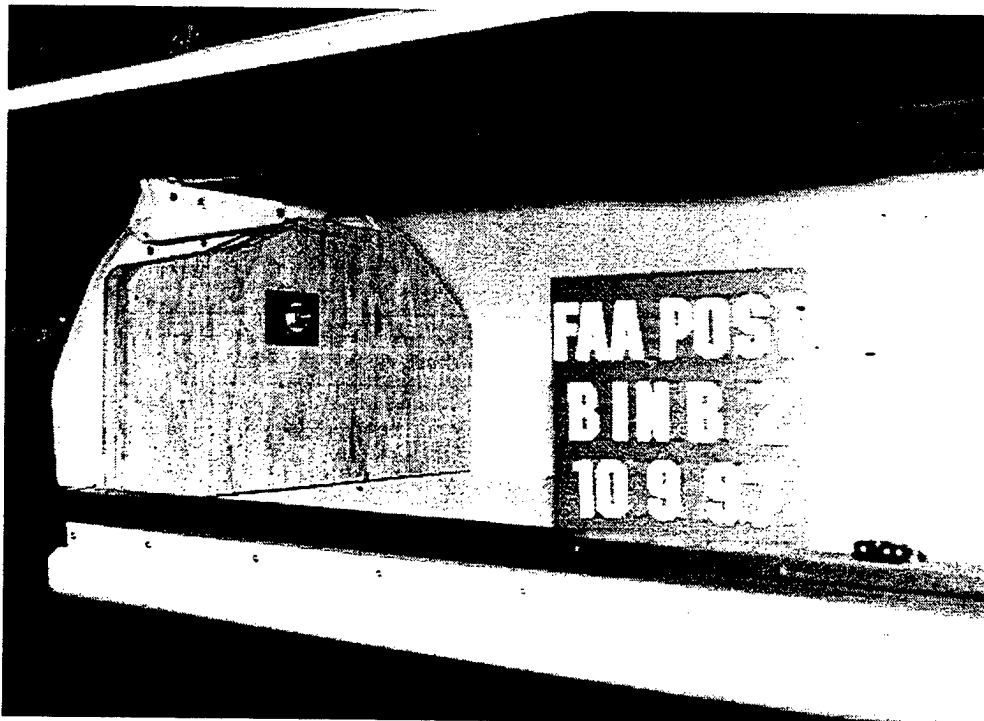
POSTTEST BIN B THREADED ROD ATTACHMENT REAR ANGLE VIEW
